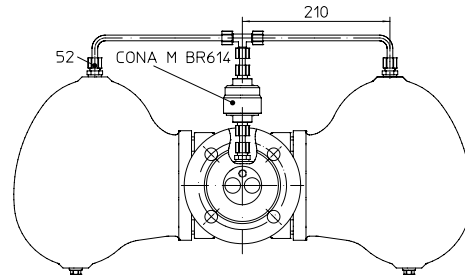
1 with flanges - horizontal installation and external vent kpl.
